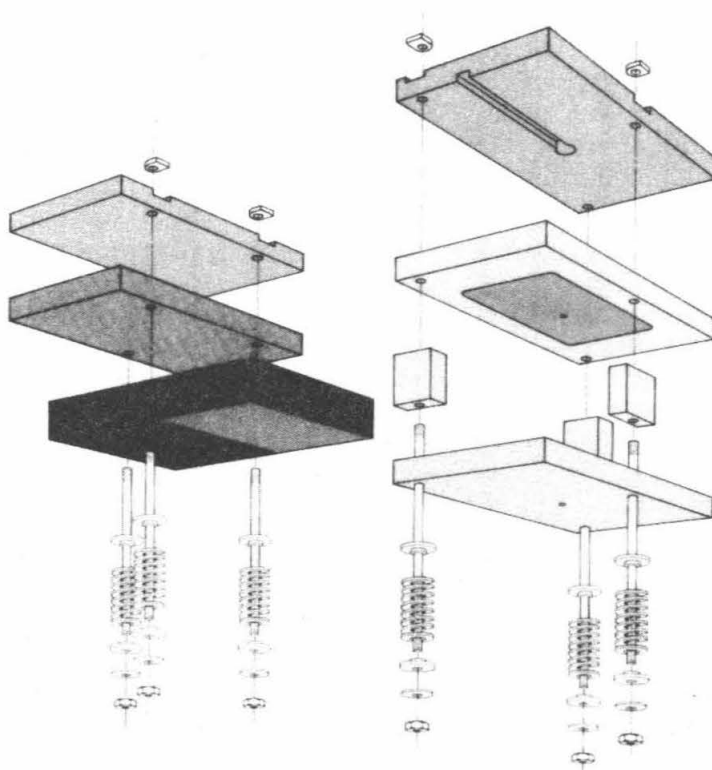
Exploded view of a sensor showing the plates of the paddle and body assemblies and the components of the constant-force mounts. The elements are described in the text.
